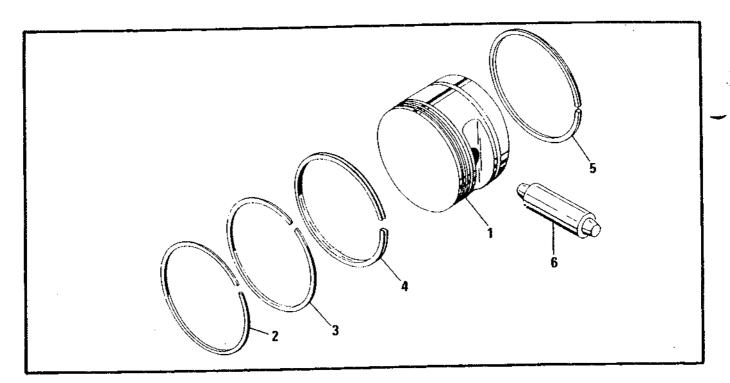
PISTON AND RING ASSEMBLY MODELS 0-470-K, L, R
